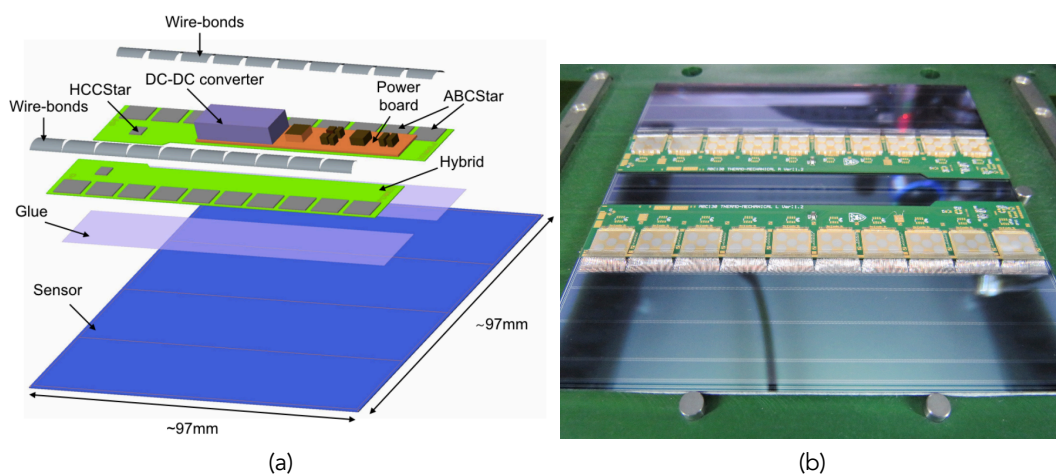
(a) Layout of a typical barrel ITk strip module. [116] (b) Picture of a similar dummy module taken into the Sheffield clean-room, only the silicon sensor is operational and the power board is missing. Picture courtesy of Dr. Guillermo Nicolas Hamity.
